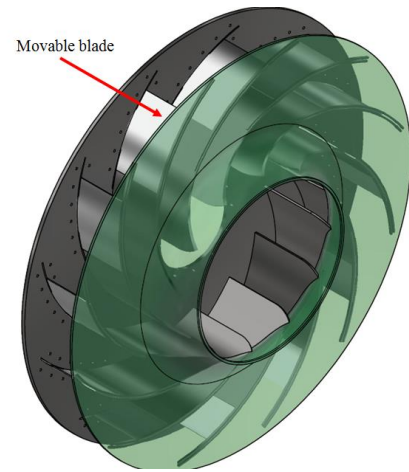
Geometrical model of the centrifugal fan impeller with the movable blade in the basic (middle) position
